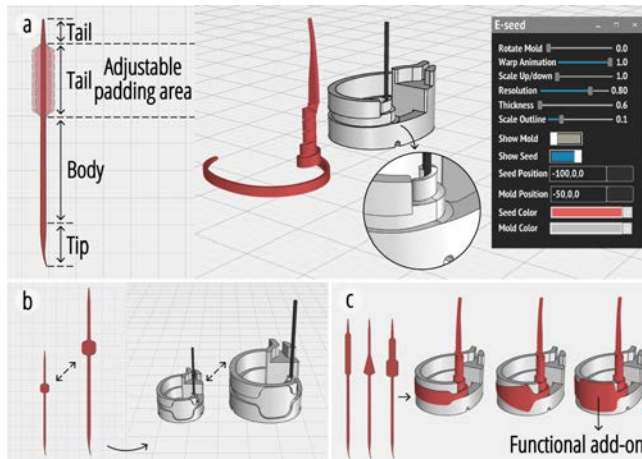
(a) The design tool for E-seed. (b) Size adjustment and (c) customized padding for add-ons are enabled.
